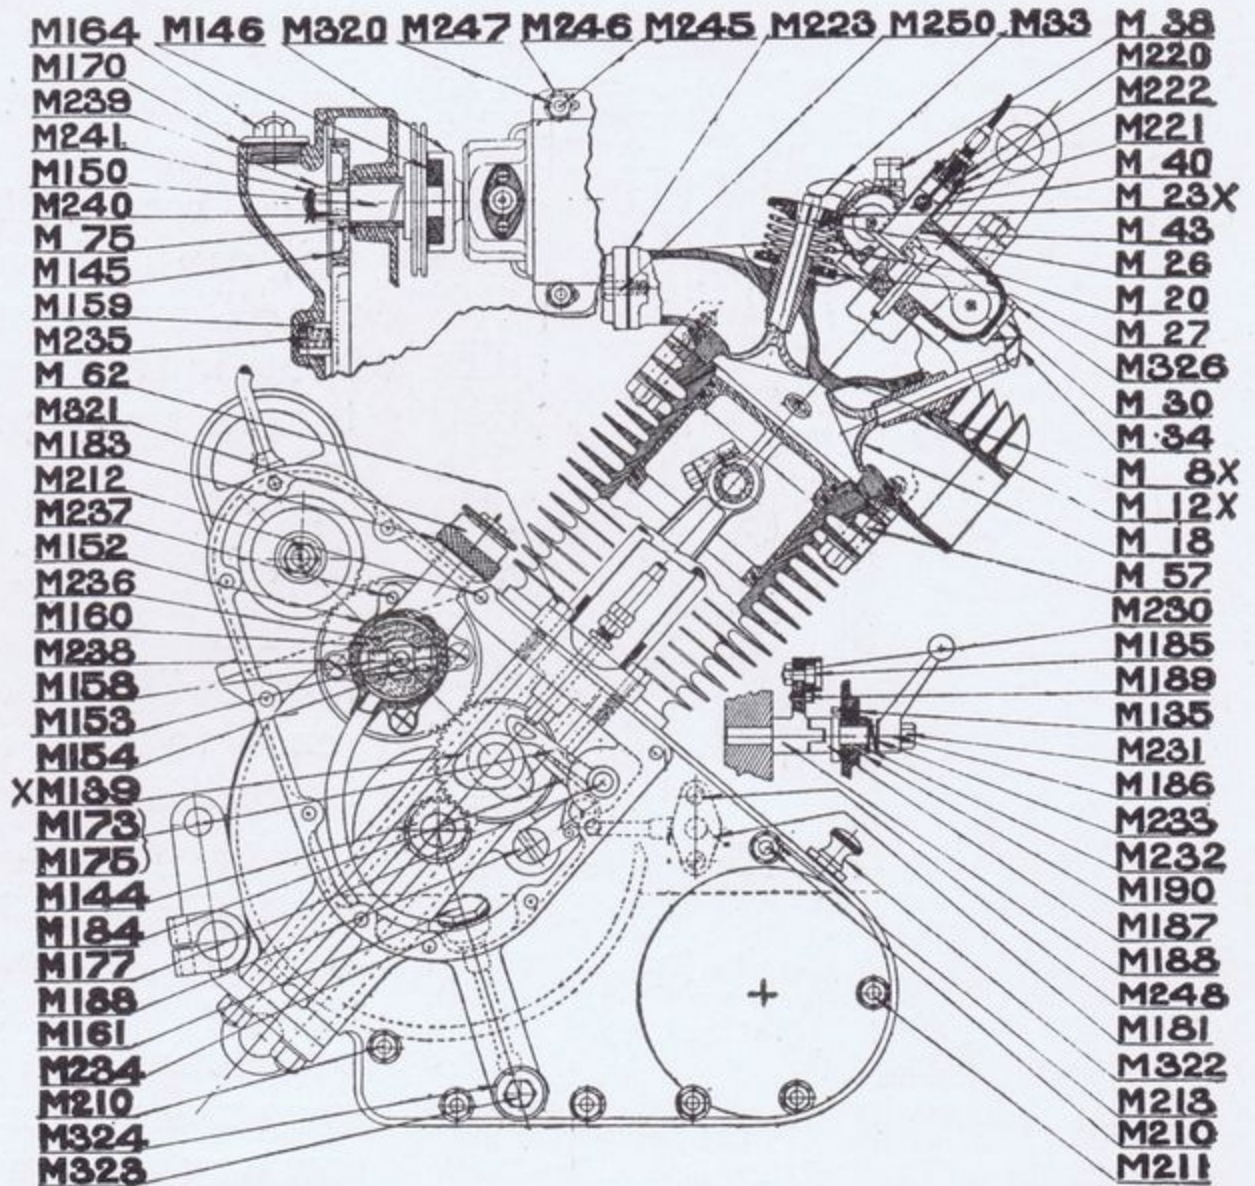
PARTS OF THE P. & M. (PANTHER) AND WHERE PLACED.
